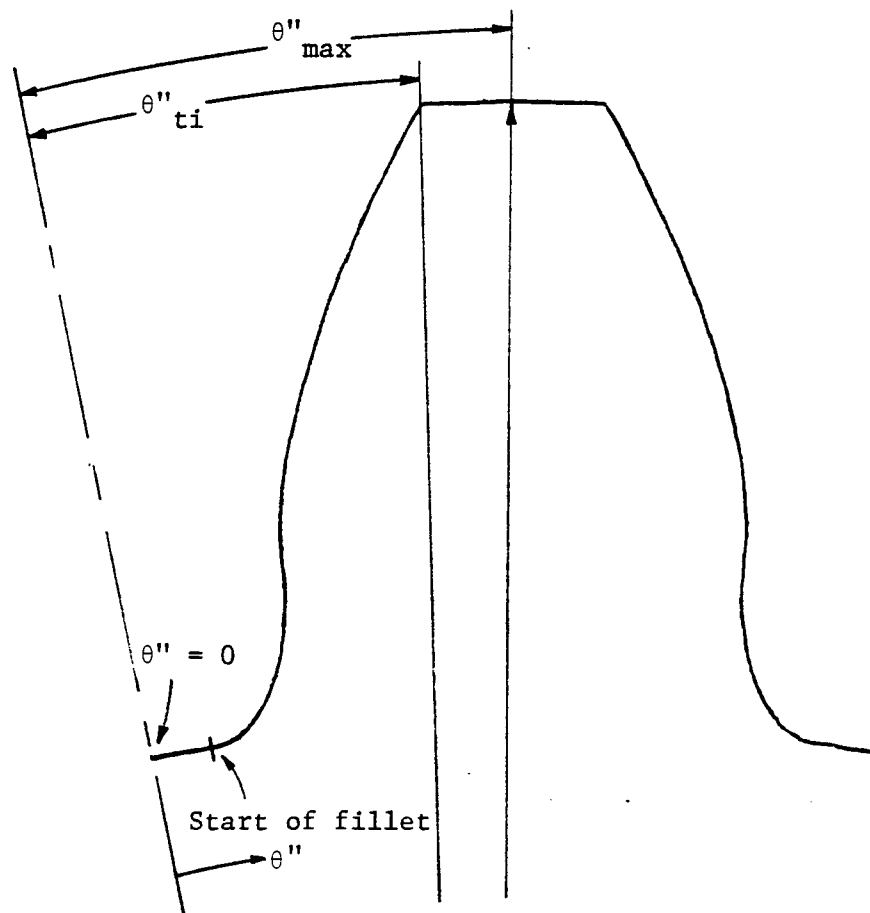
Geometry of Bottom and Top Land Sections on a Spur Gear Tooth (symbols explained in text)
